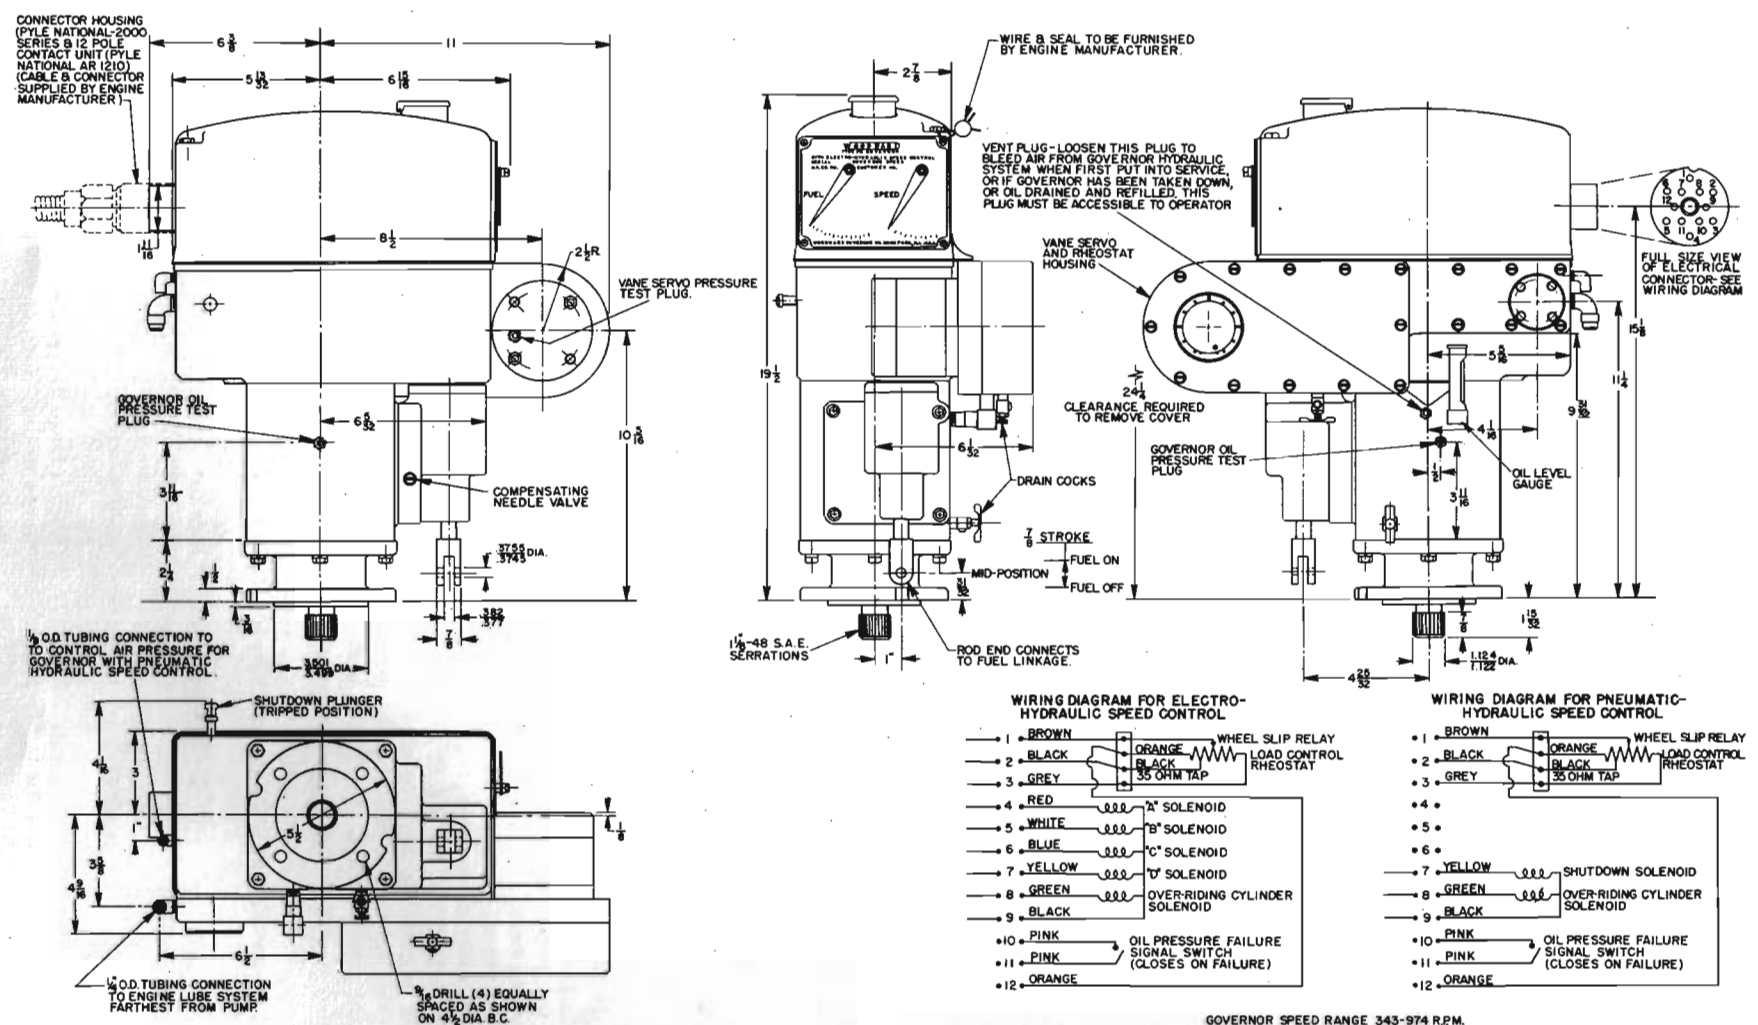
Outline Drawing, PG Locomotive Governor with Integral Load Regulator.
